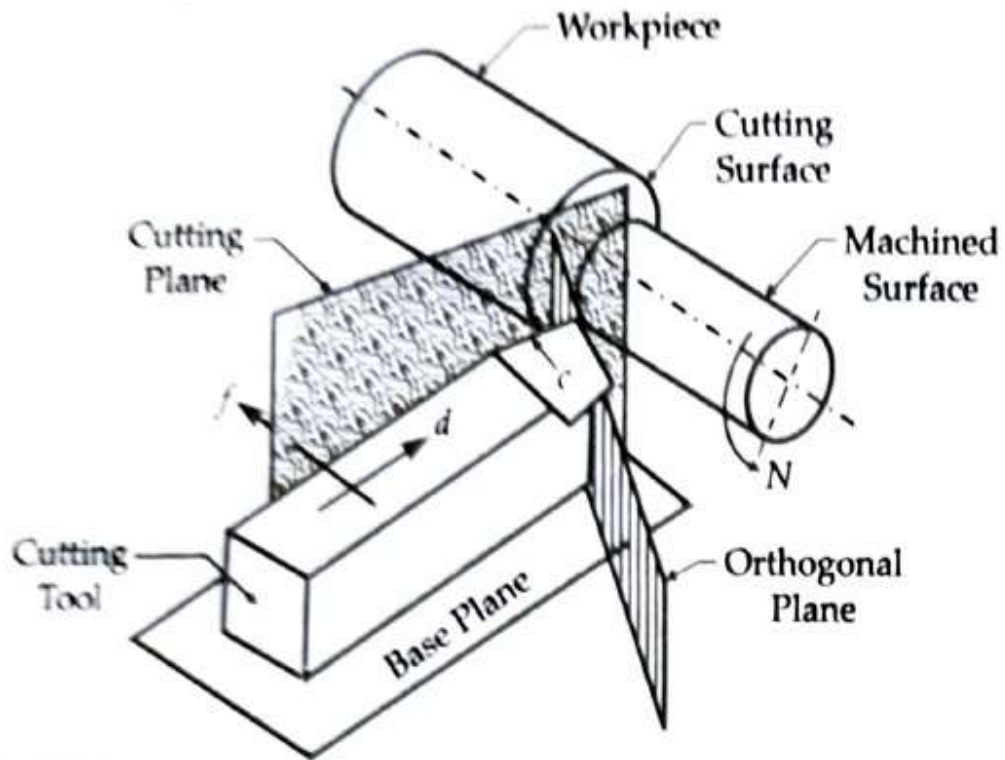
Tool and workpiece in orthogonal system of reference planes
